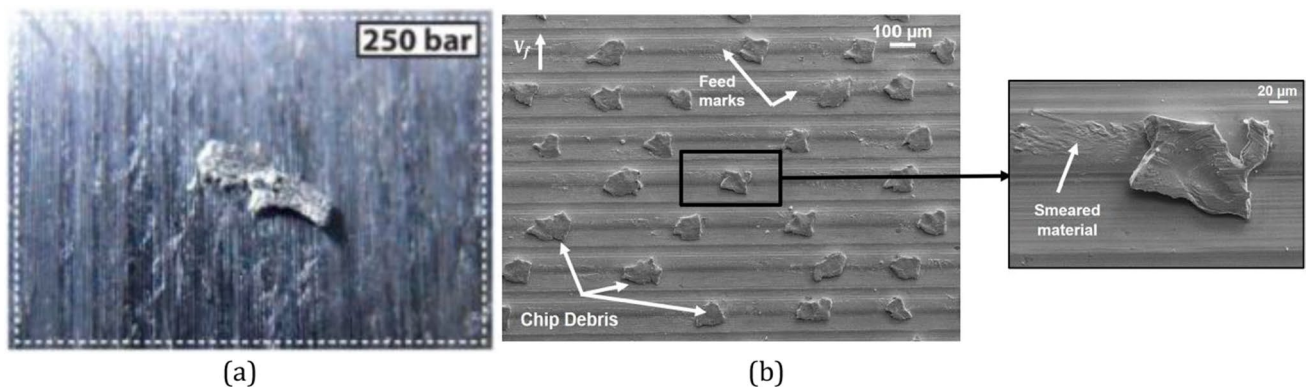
Chip welding/recycling: a high-pressure lubrication assisted machining of Ti17 titanium alloy [49] and b cryogenic assisted machining of Inconel 718 (liquid nitrogen) [53]
